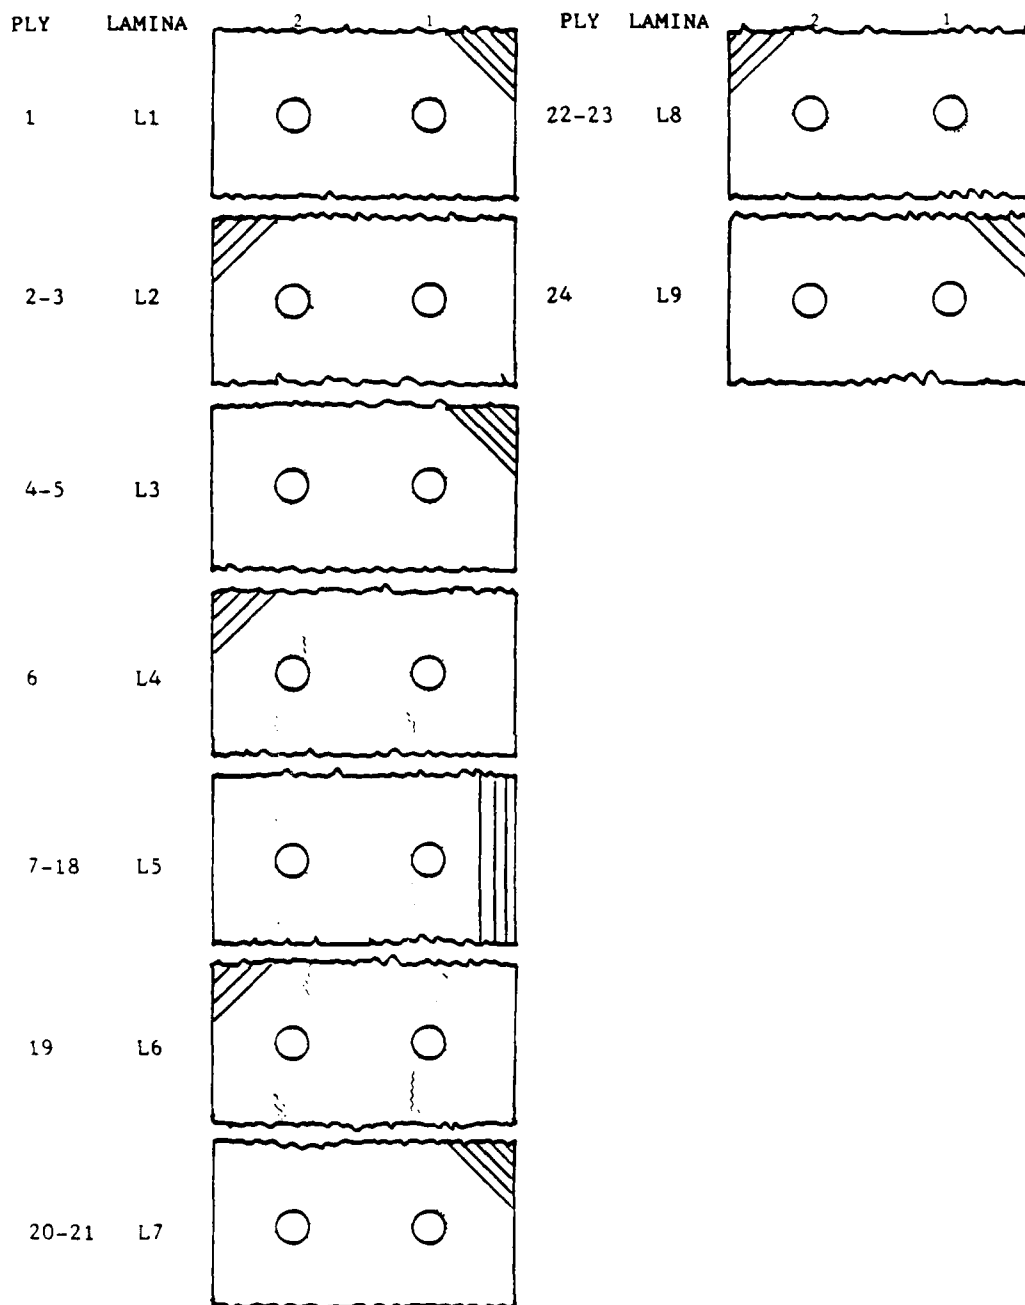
Lamina Damage Characterization Chart for Specimen I-B-18 Load Level B
